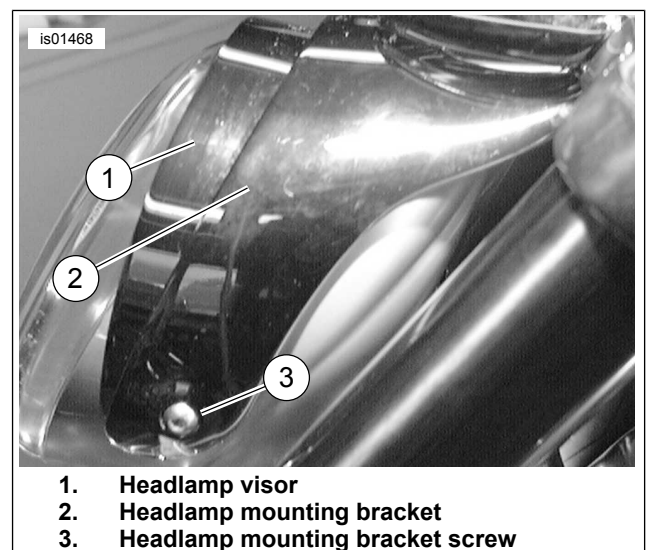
Install Visor Between Headlamp and Mounting Bracket (Left Side Shown)
